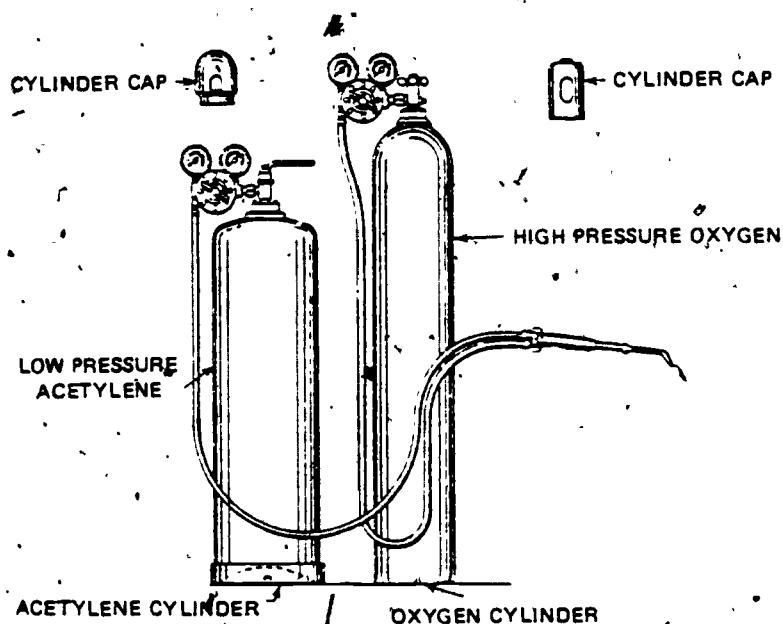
Acetylene and oxygen cylinders in standard oxyacetylene welding rig.
